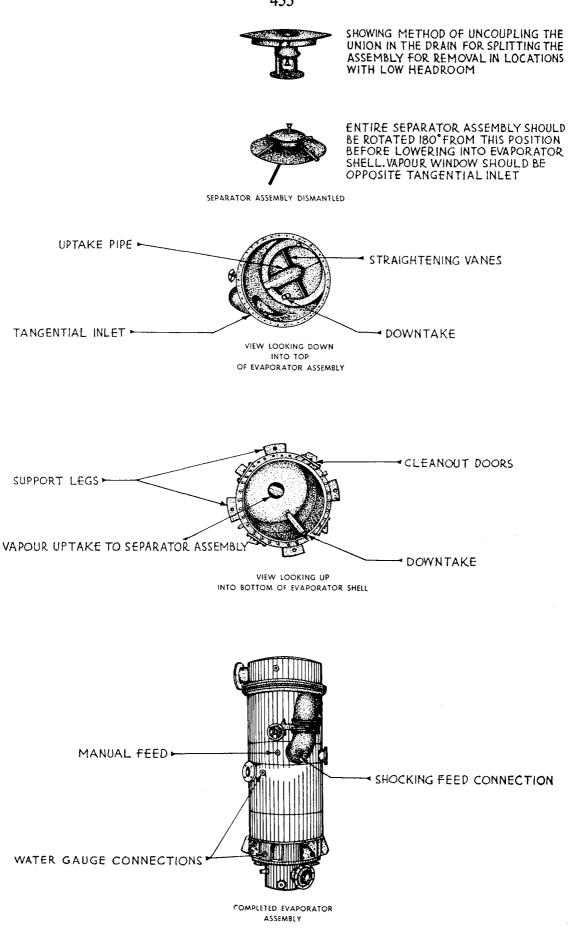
EXPLODED VIEW OF W112D EVAPORATOR
